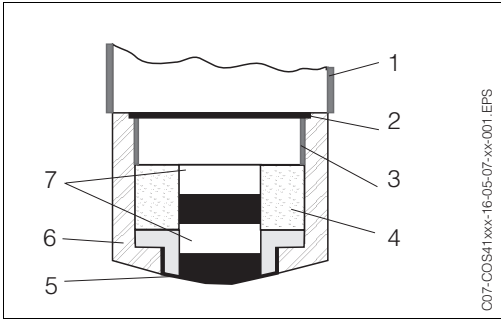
Sensor head with membrane cap (Side view with cut-away view of membrane cap)
